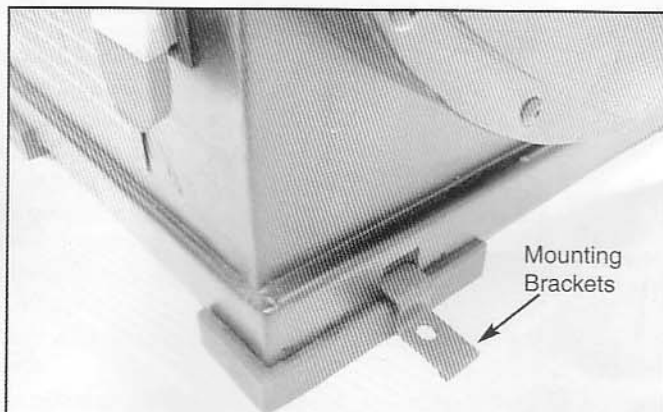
Insert Mounting Brackets into Slots of Sander Base
